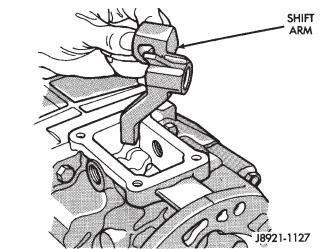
Position Shift Arm in Adapter or Extension Housing
